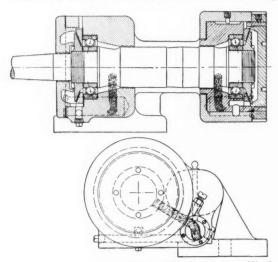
Shafting equipped with grease lubricated ball bearings. Note self-locking collar and steel dust caps. The latter serve to prevent leakage of grease and entry of dust and dirt.
